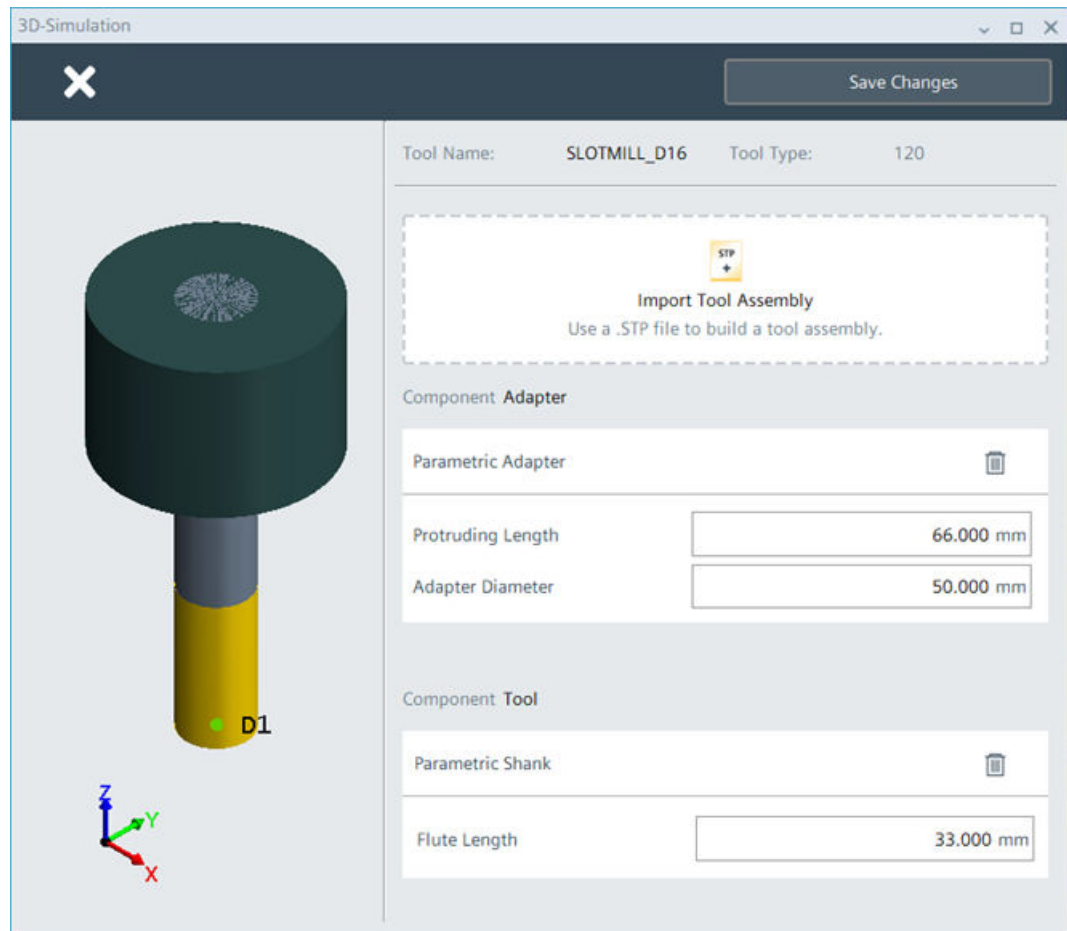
Defining protection for adapter and tool via parameters using the example of an end mill
